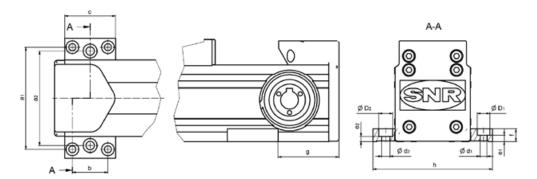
Dimensions fastening strips AXC / AXDL
